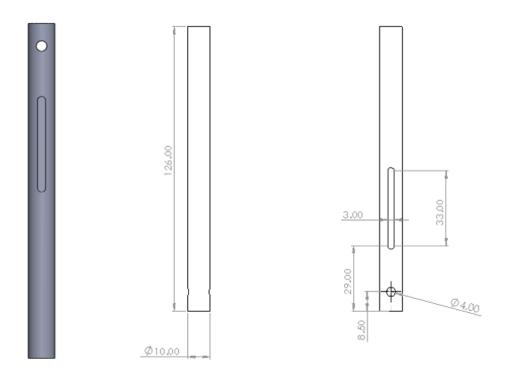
CAD model and dimensions of Arm 1 worm gear shaft
